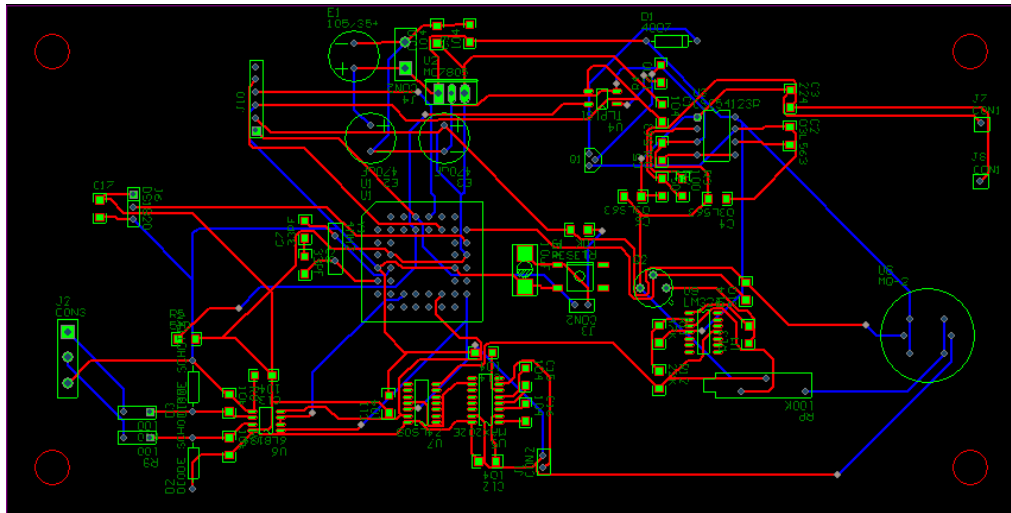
PCB DESIGN OF DETECTING SYSTEM
